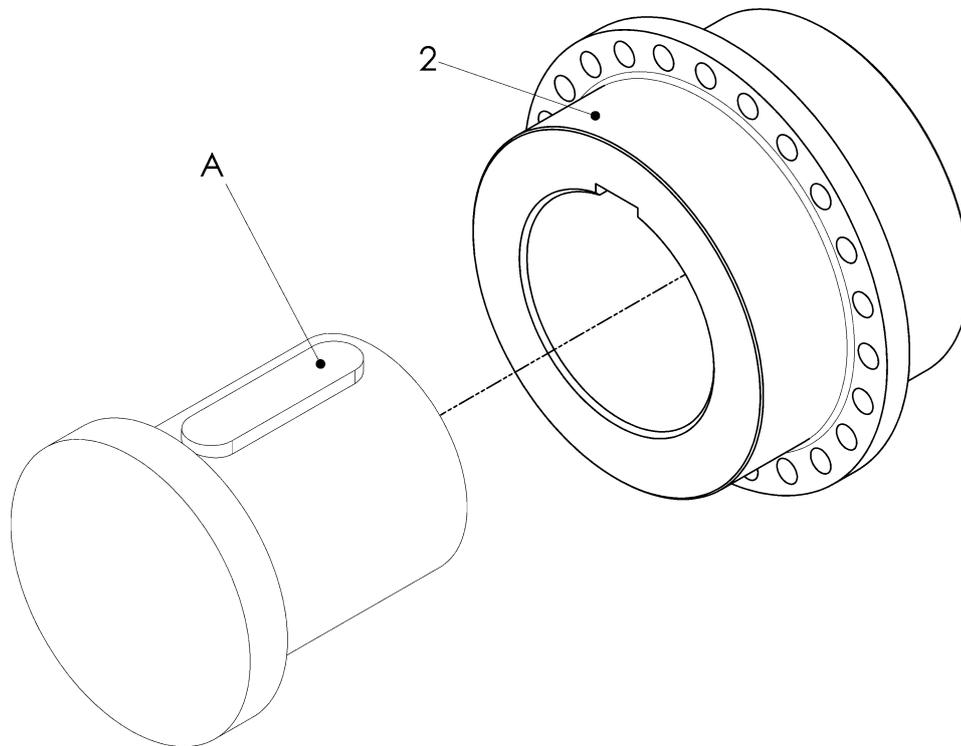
Mounting the hub with cylindrical bore and keyway
